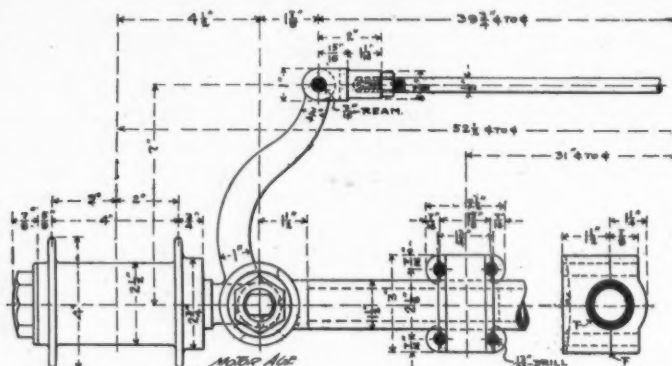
FRONT AXLE, SHOWIN HUB, STEERING KNUCKLE, LEVER, CONNECTING ROD AND SPRING BLOCK.
